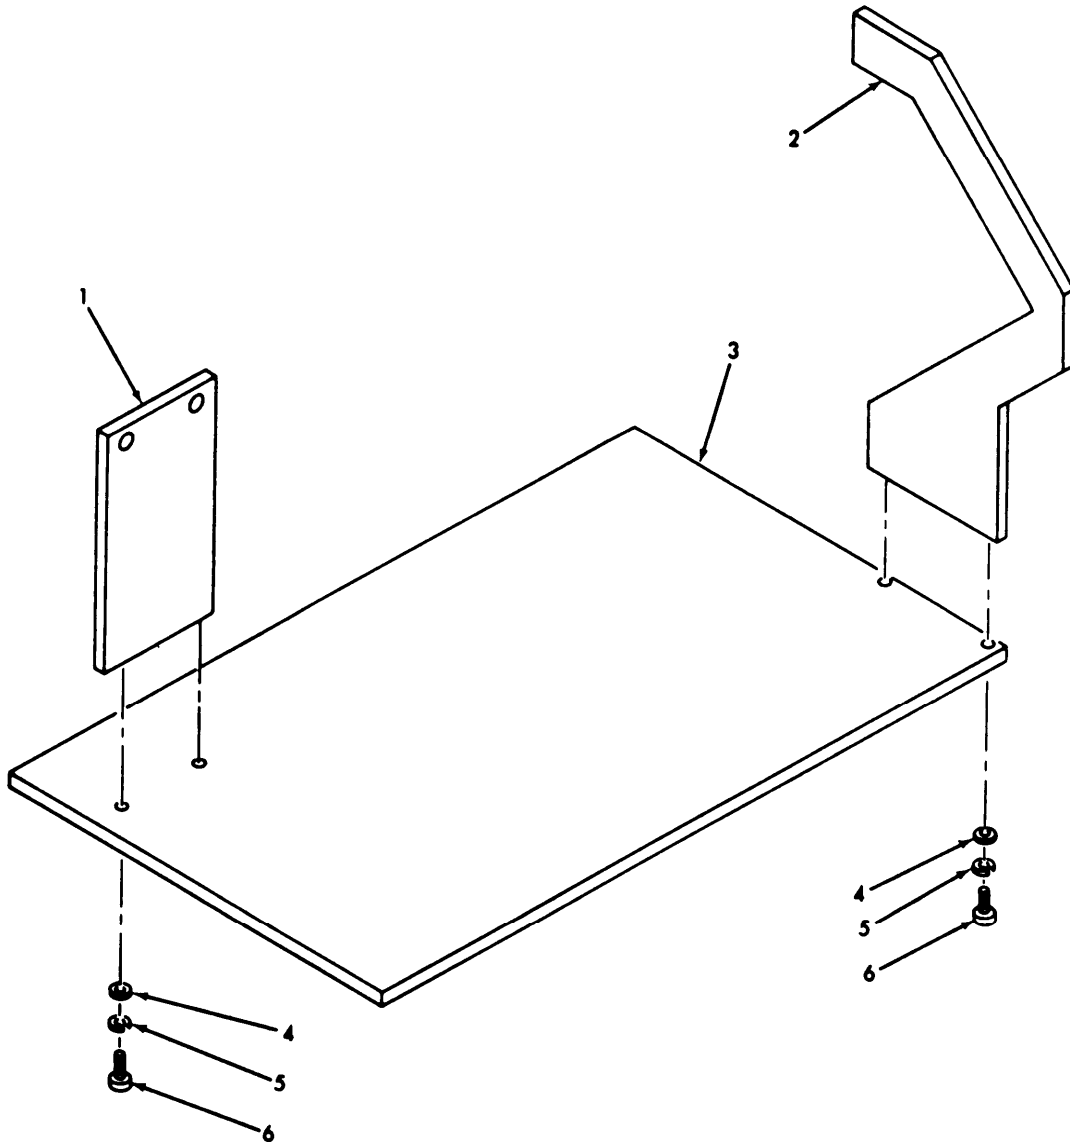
COMMAND HOLDING FIXTURE ASSEMBLY COMPONENT PARTS (ASSY P/N SM-D-807163).
